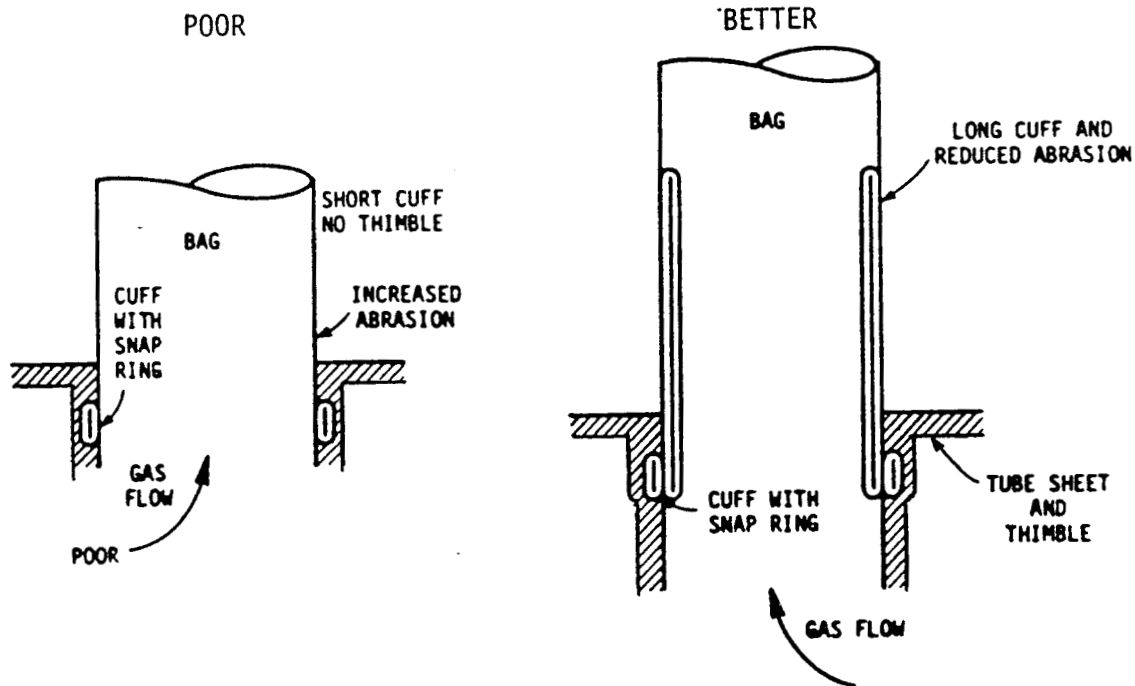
Methods of bag attachment in shaker and reverse-air fabric filters.
